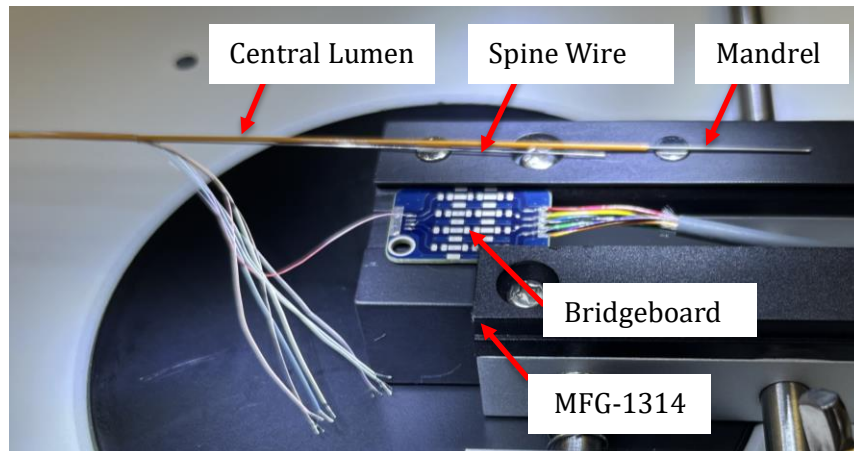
Placement of catheter subassembly and catheter cable onto circuit board holder
